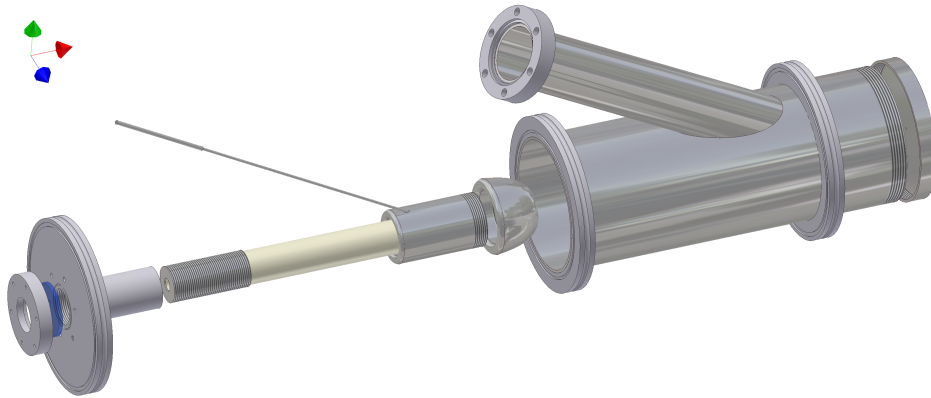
Three dimensional rendering of disassembled electron gun design.
